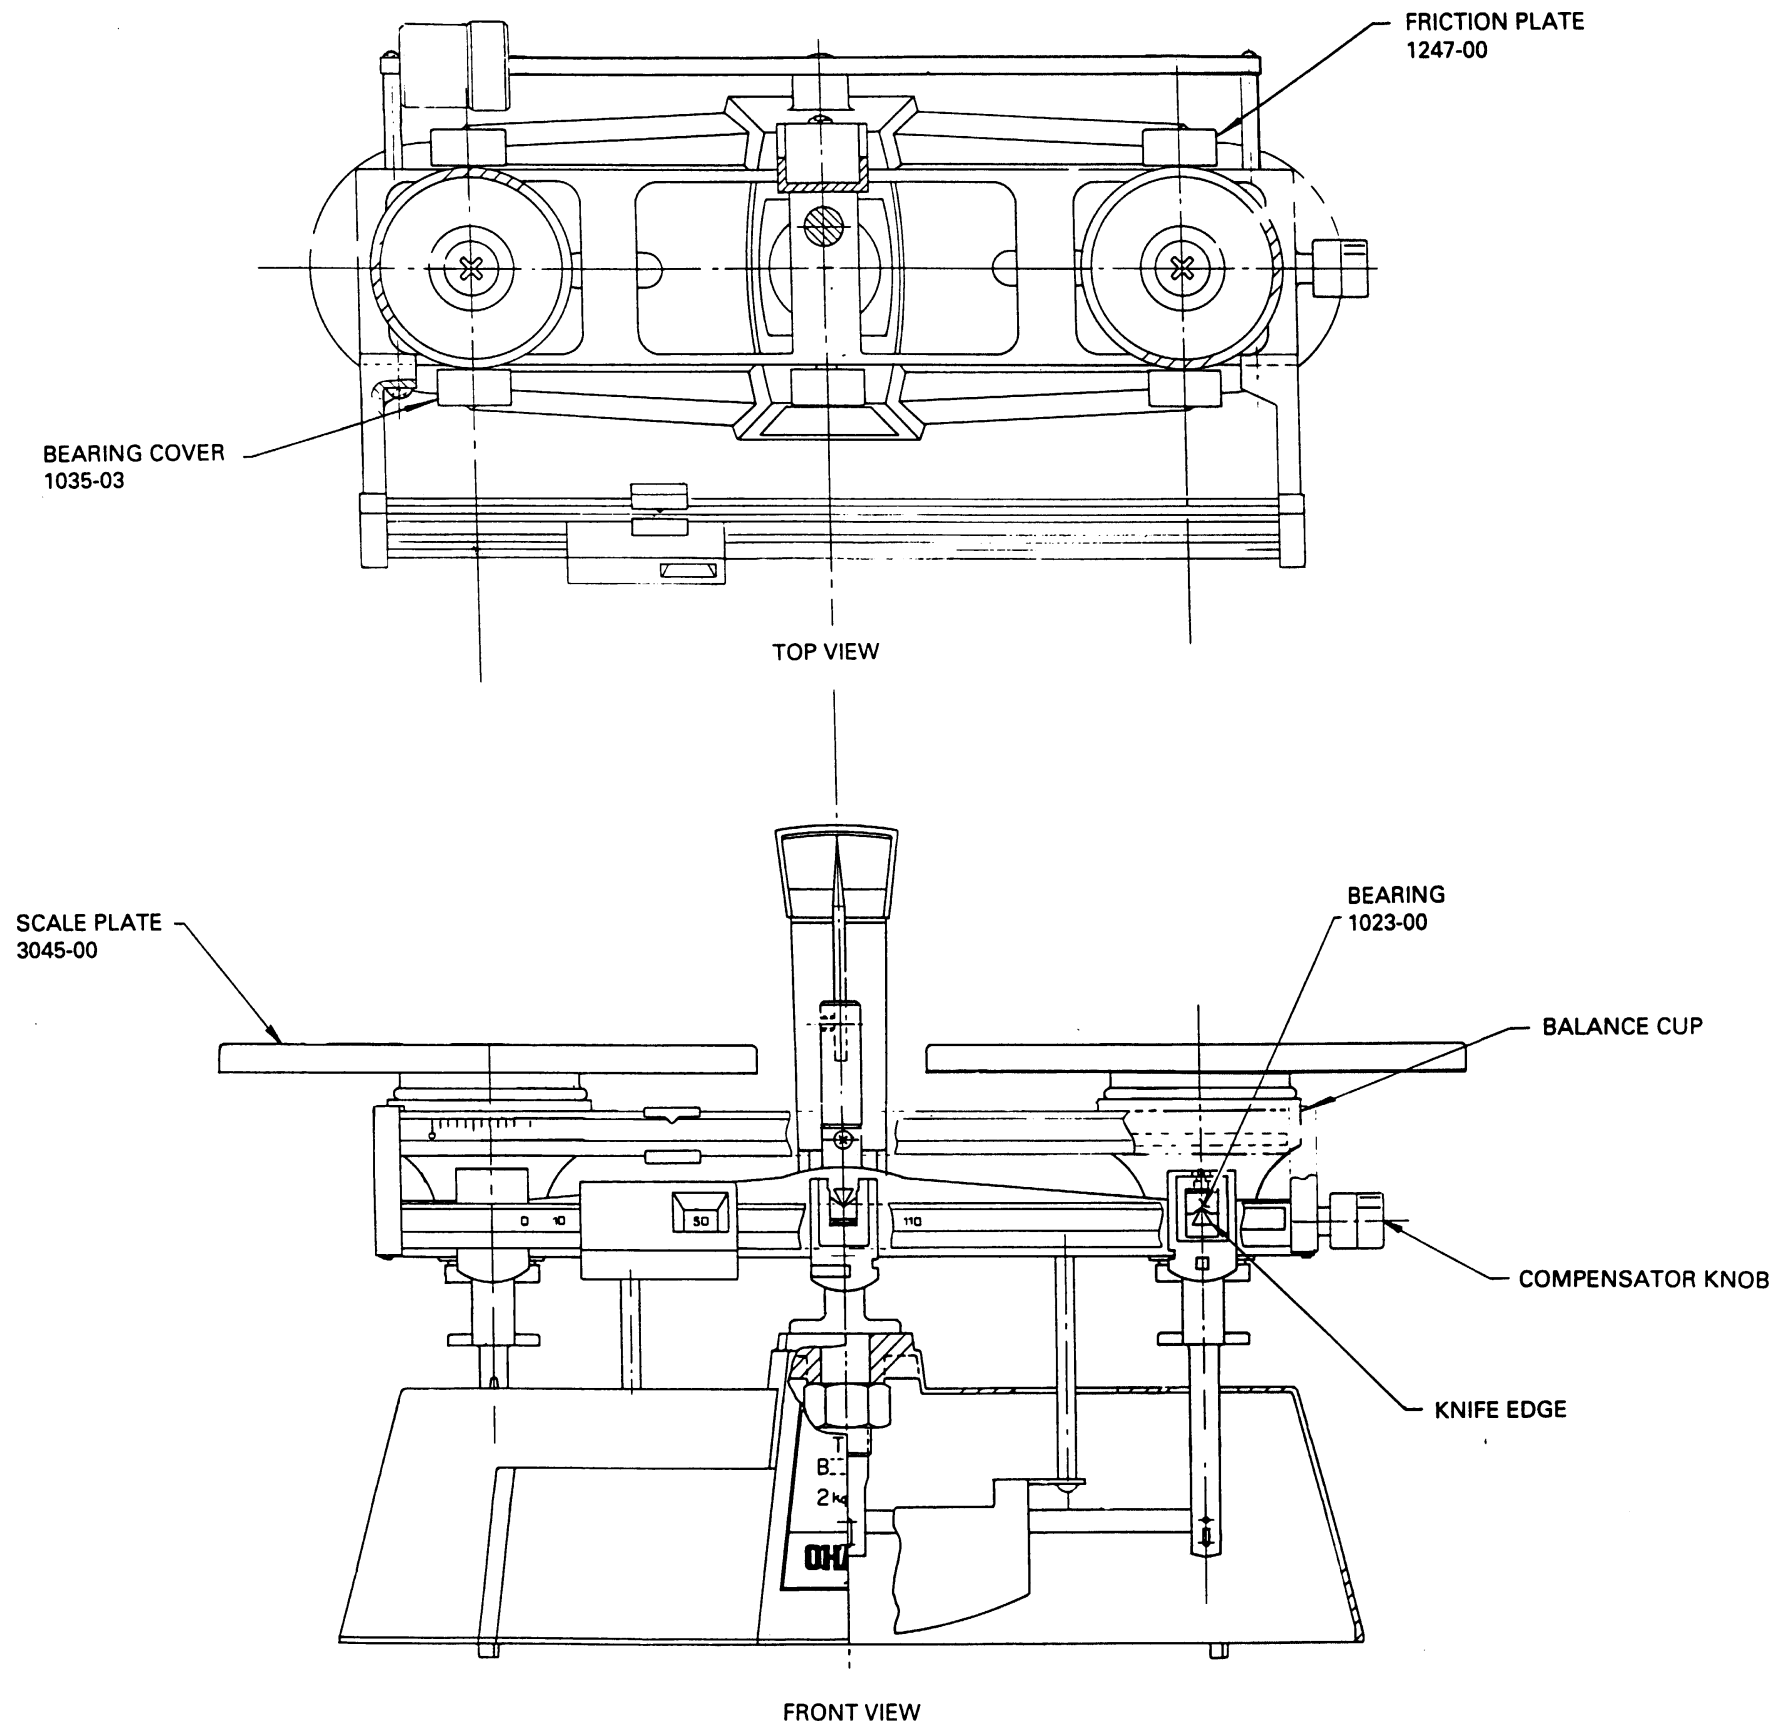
Harvard Trip Balance Drawing. 5-9/5-10
